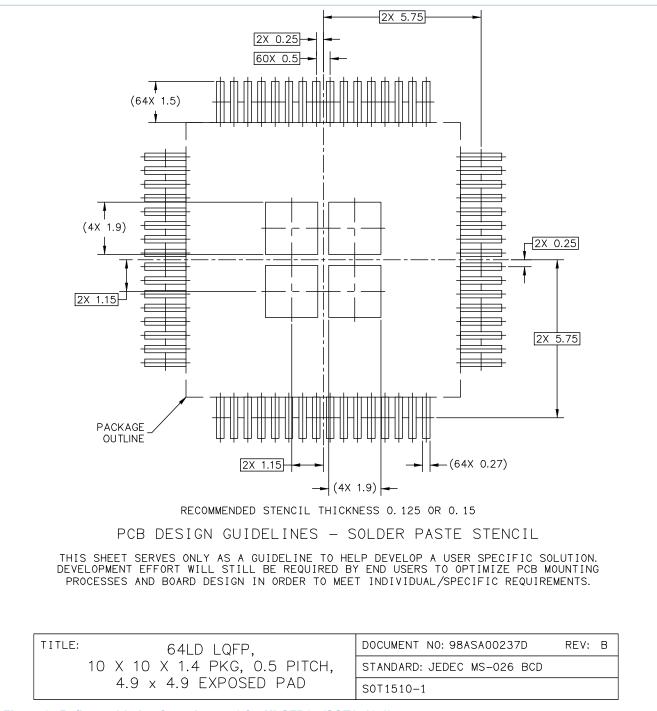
Reflow soldering footprint part3 for HLQFP64 (SOT1510-1)
